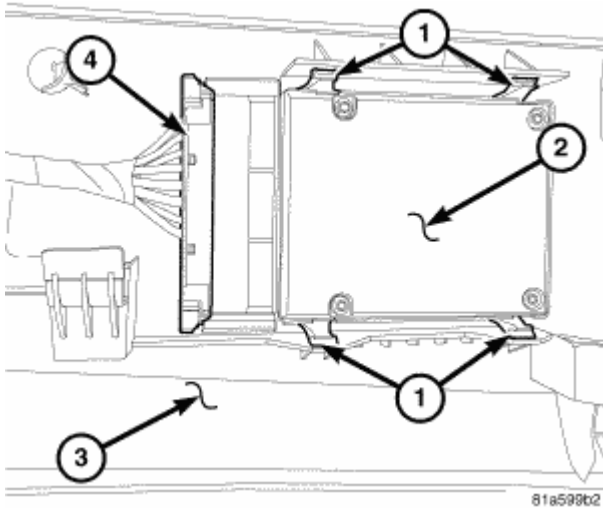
Identifying Mounting Tabs, Power Seat Switch, Seat Cushion Side Shield & Power Seat Switch Electrical Harness Connector
